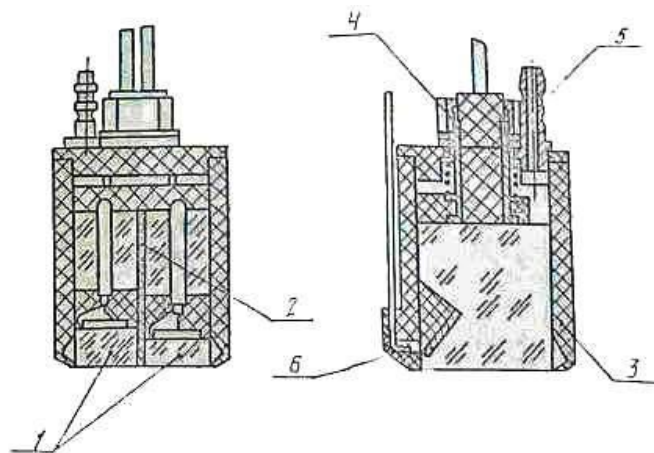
UT search unit with 30° and 40° wedges: 1- search units (left - 40° and right - 30° wedges, correspondingly); 2 - screen; 3 – holder; 4 – screw-nut; 5- nozzle; 6 - couplant sensor
